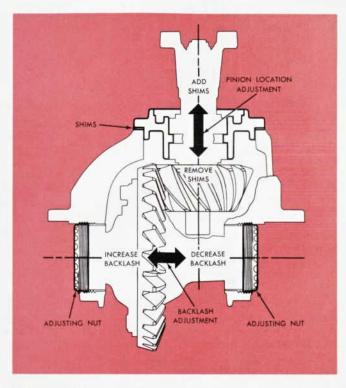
Pinion and Ring Gear Tooth Contact Adjustment
